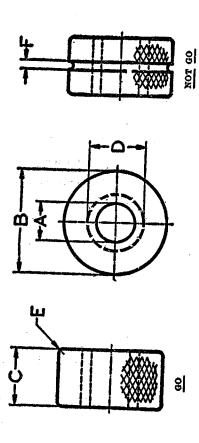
American Gage Design Standard plain ring gages, details of construction.
